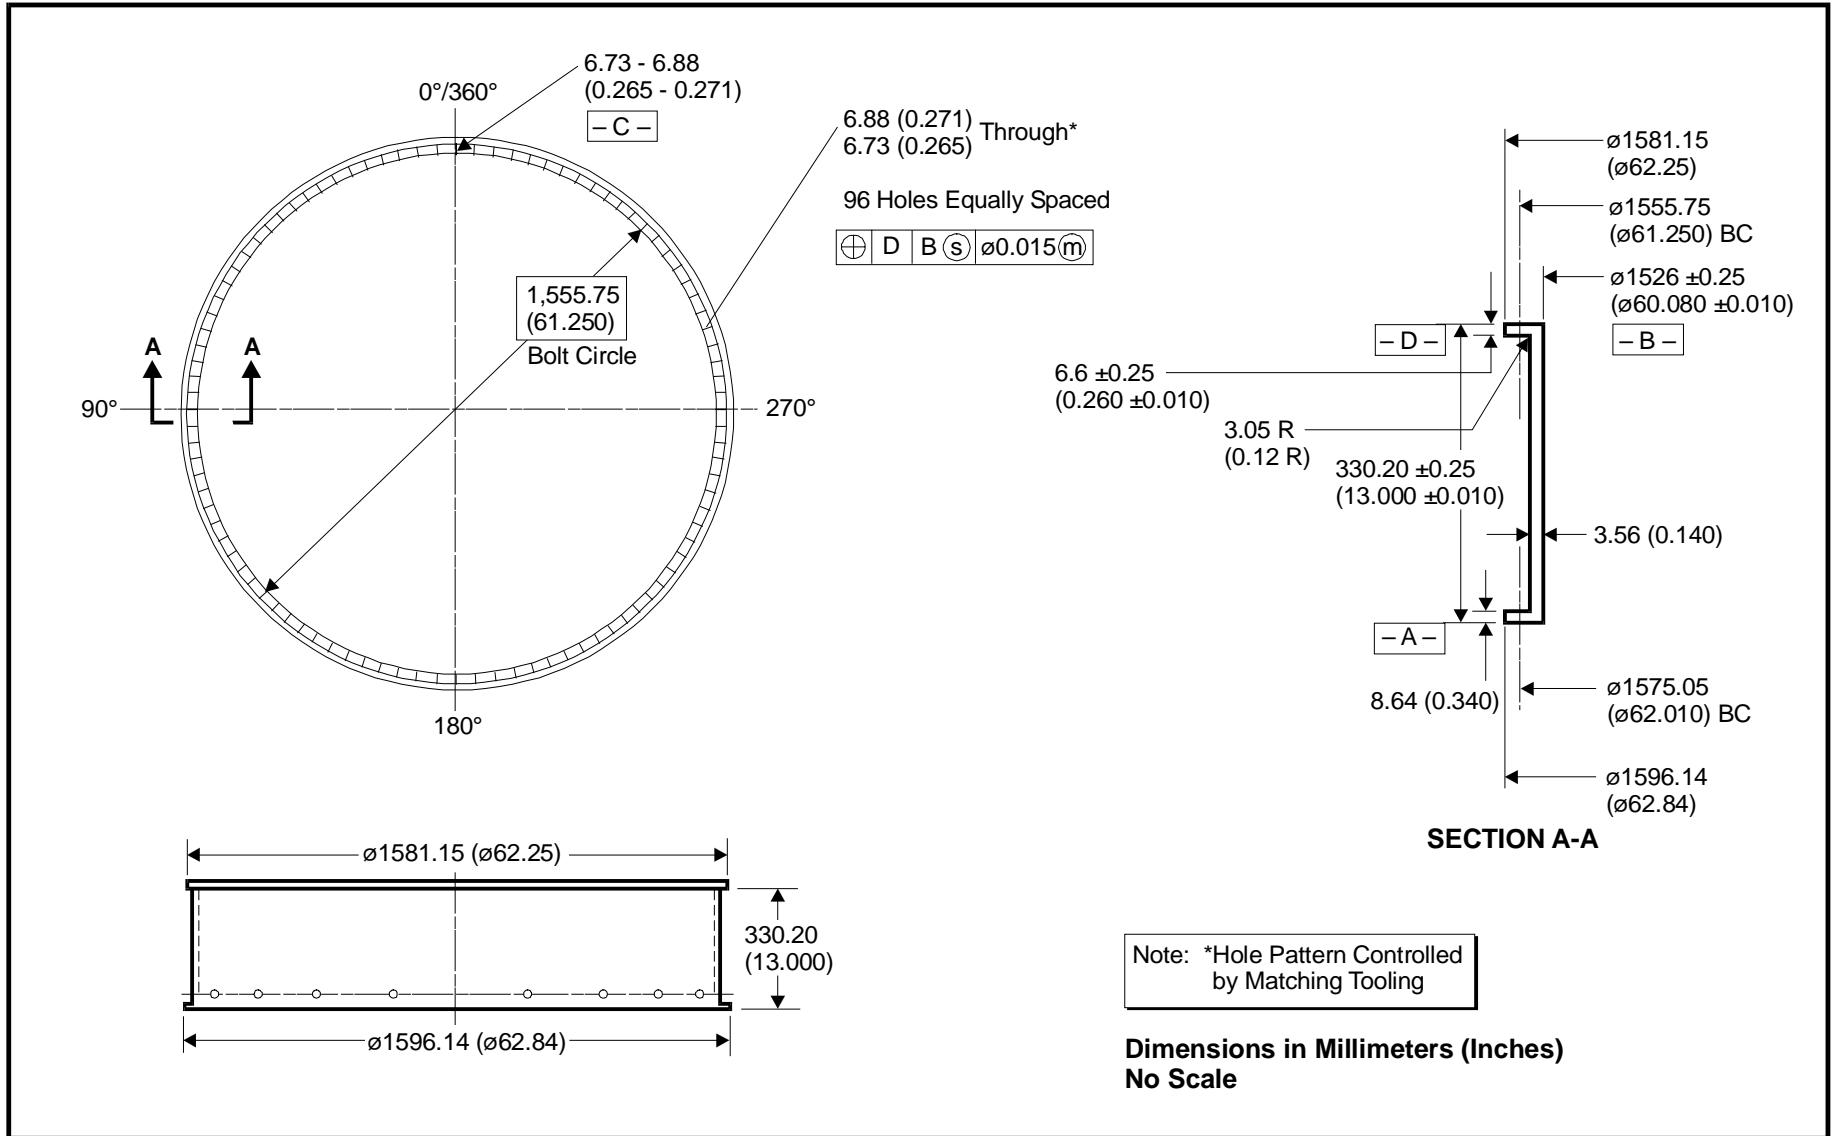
Type C Payload Adapter Mechanical Interfaces
